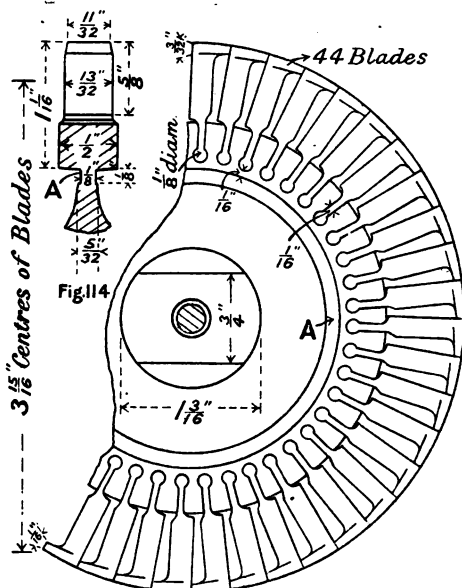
5-B.H.P. De Laval Turbine Wheel and Spindle.
